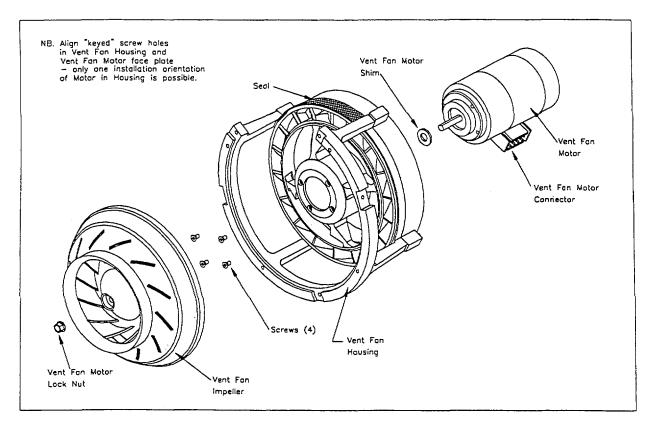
Detail, Vent Fan Motor Orientation
